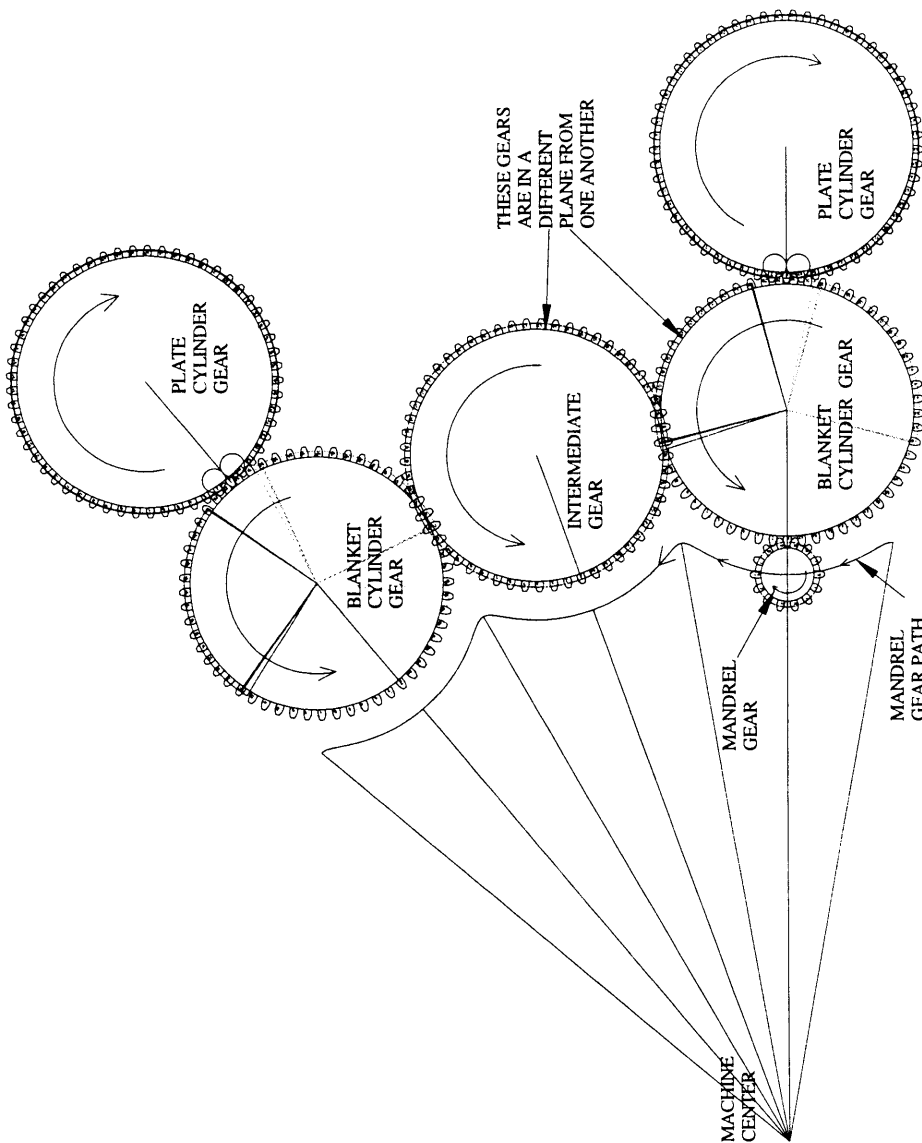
Relationship between mandrel, blanket, intermediate and plate gears.
